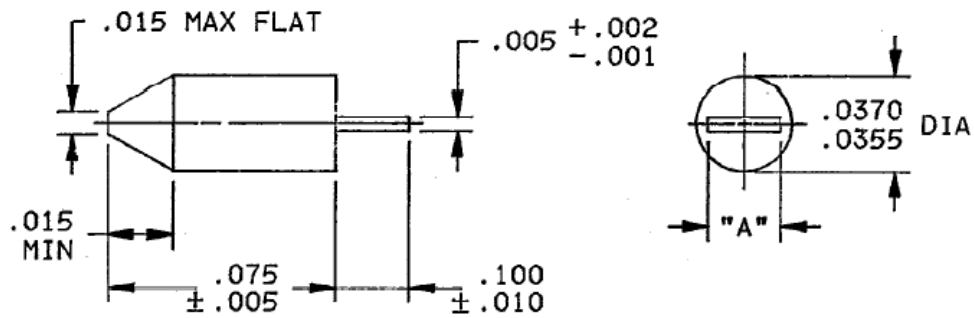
Series SMA (.080 inch minimum) socket contact (4 hole) flange mounted receptacle.
